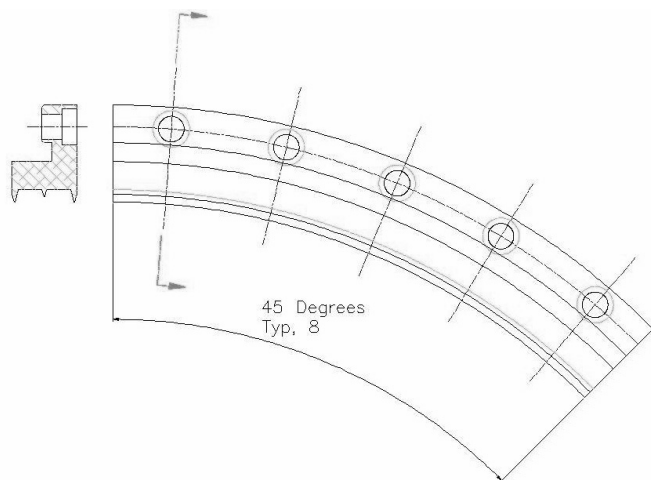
Drawing of OEM Designed Axially Bolted Eye Labyrinth.
